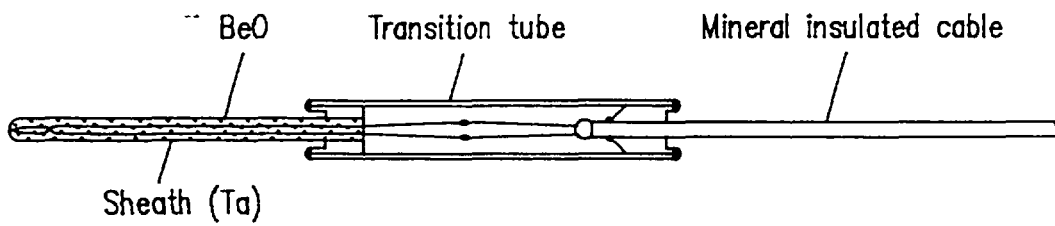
Configuration of W3%Re/W25%Re thermocouple assembly
